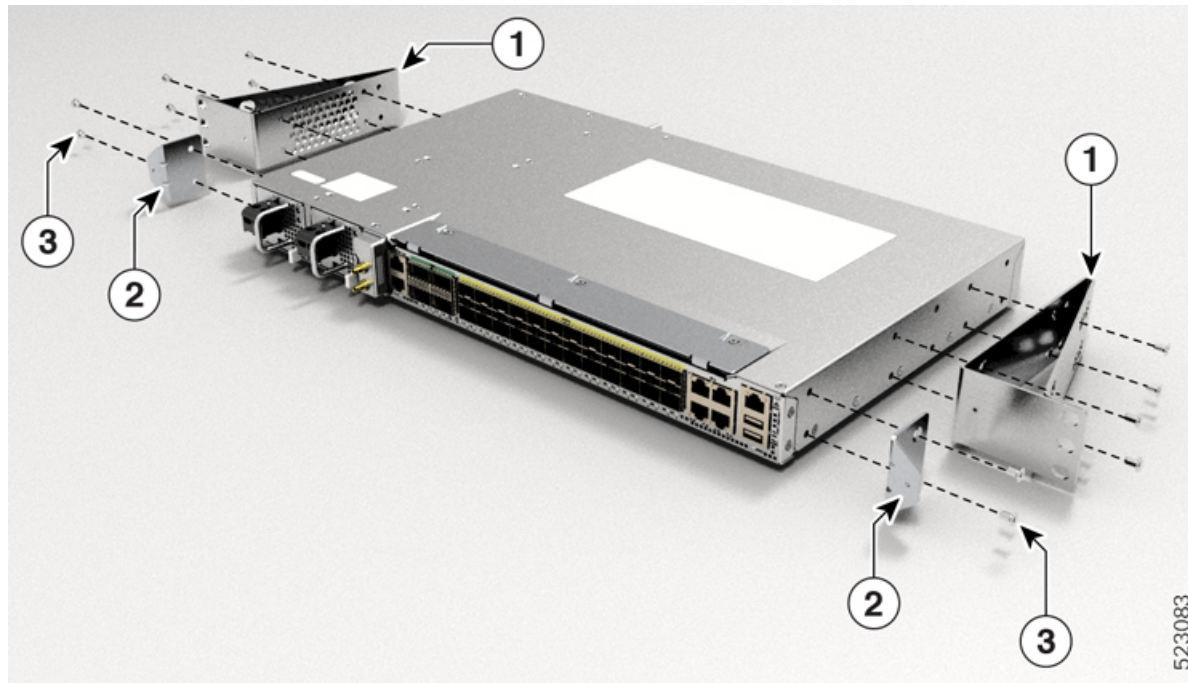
Installing Cable Management and 23 inch Rack-Mount Brackets in the Front
